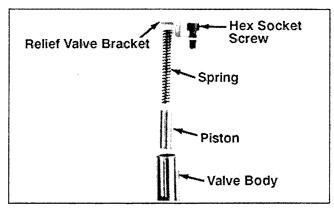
Removing Oil Pressure Relief Valve Body, Piston, And Spring.
